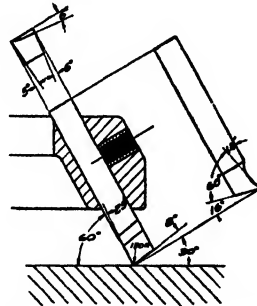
Design of blade of inserted blade face mill shown in Fig. 8.
